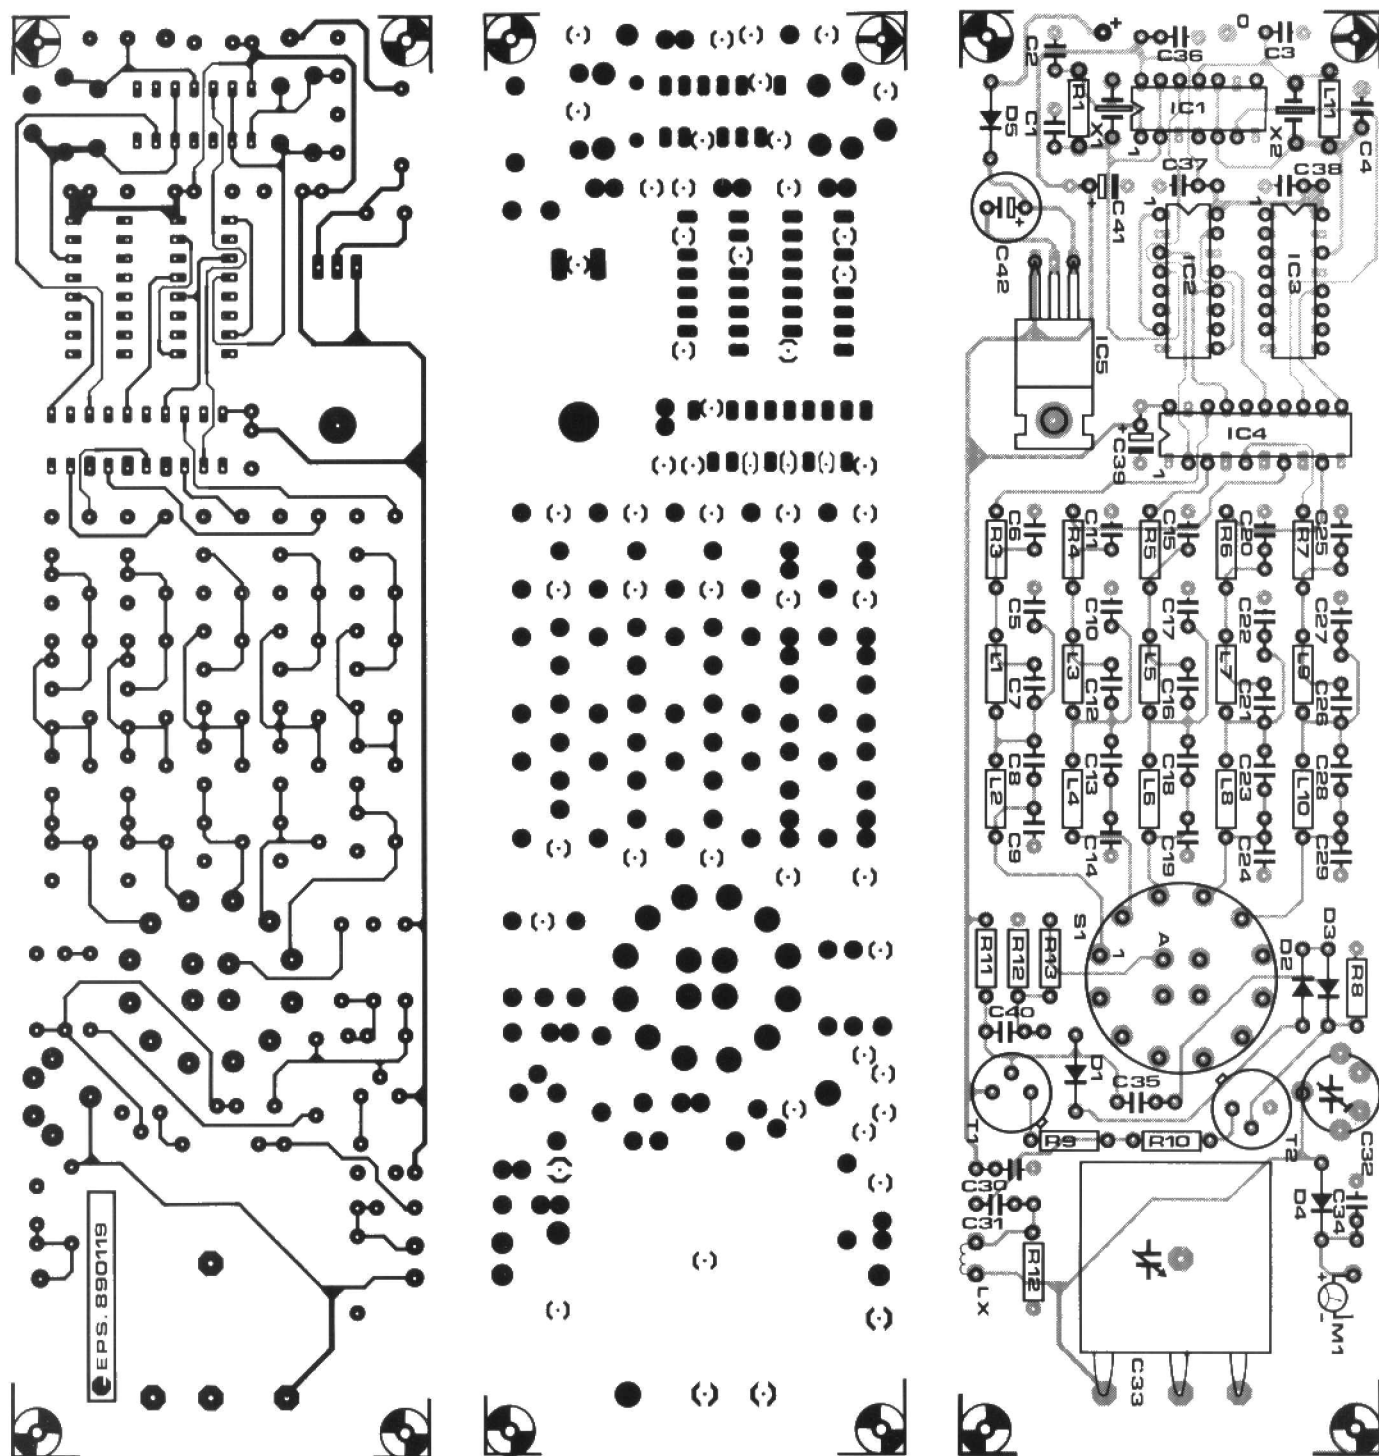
Track lay-outs and component mounting plan of the double-sided printed-circuit board for the RF Inductance meter.
